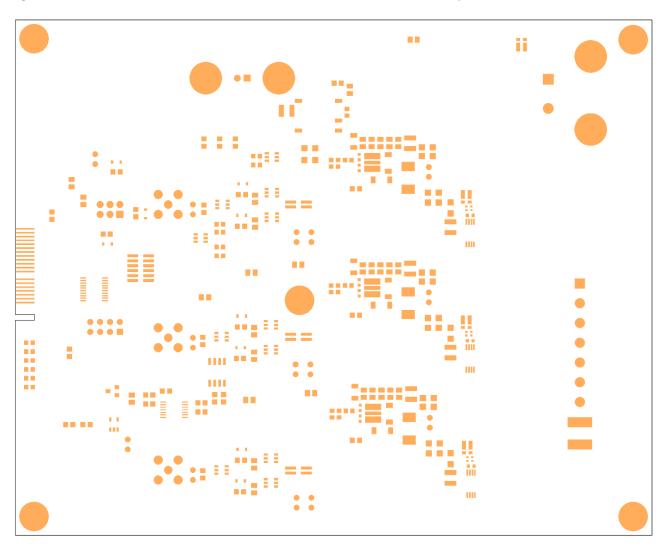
EPC7C021/EPC7011L7 3-Phase Motor Driver Evaluation Board Top Solder Mask.
